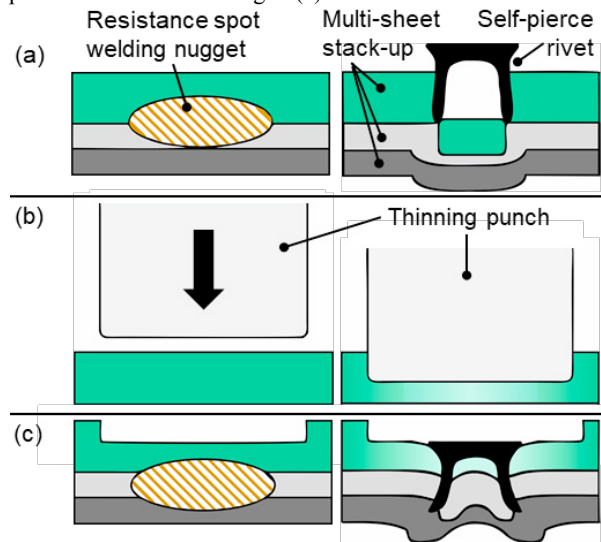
(a) Initial conditions for resistance spot welding (left) and self-pierce riveting (right); (b) creating the local thinning and softening; (c) joining with adapted sheet thickness combination.
